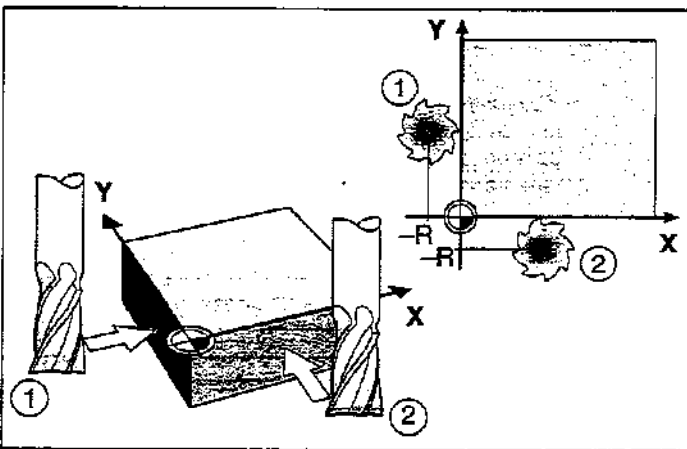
Setting the datum in the working plane; plan view (upper right)
